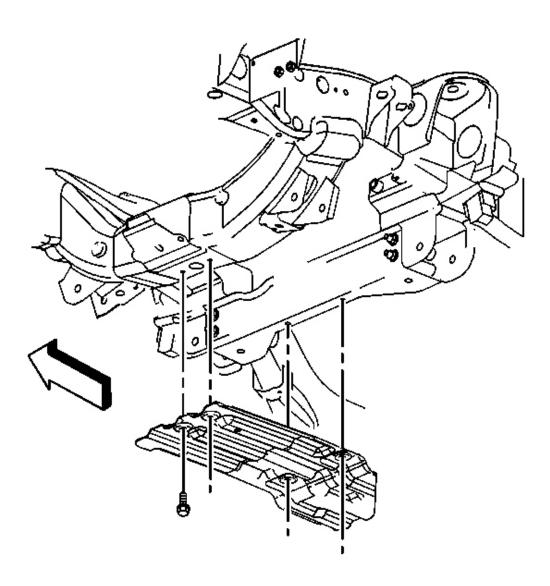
Identifying Oil Pan Skid Plate Courtesy of GENERAL MOTORS CORP.
